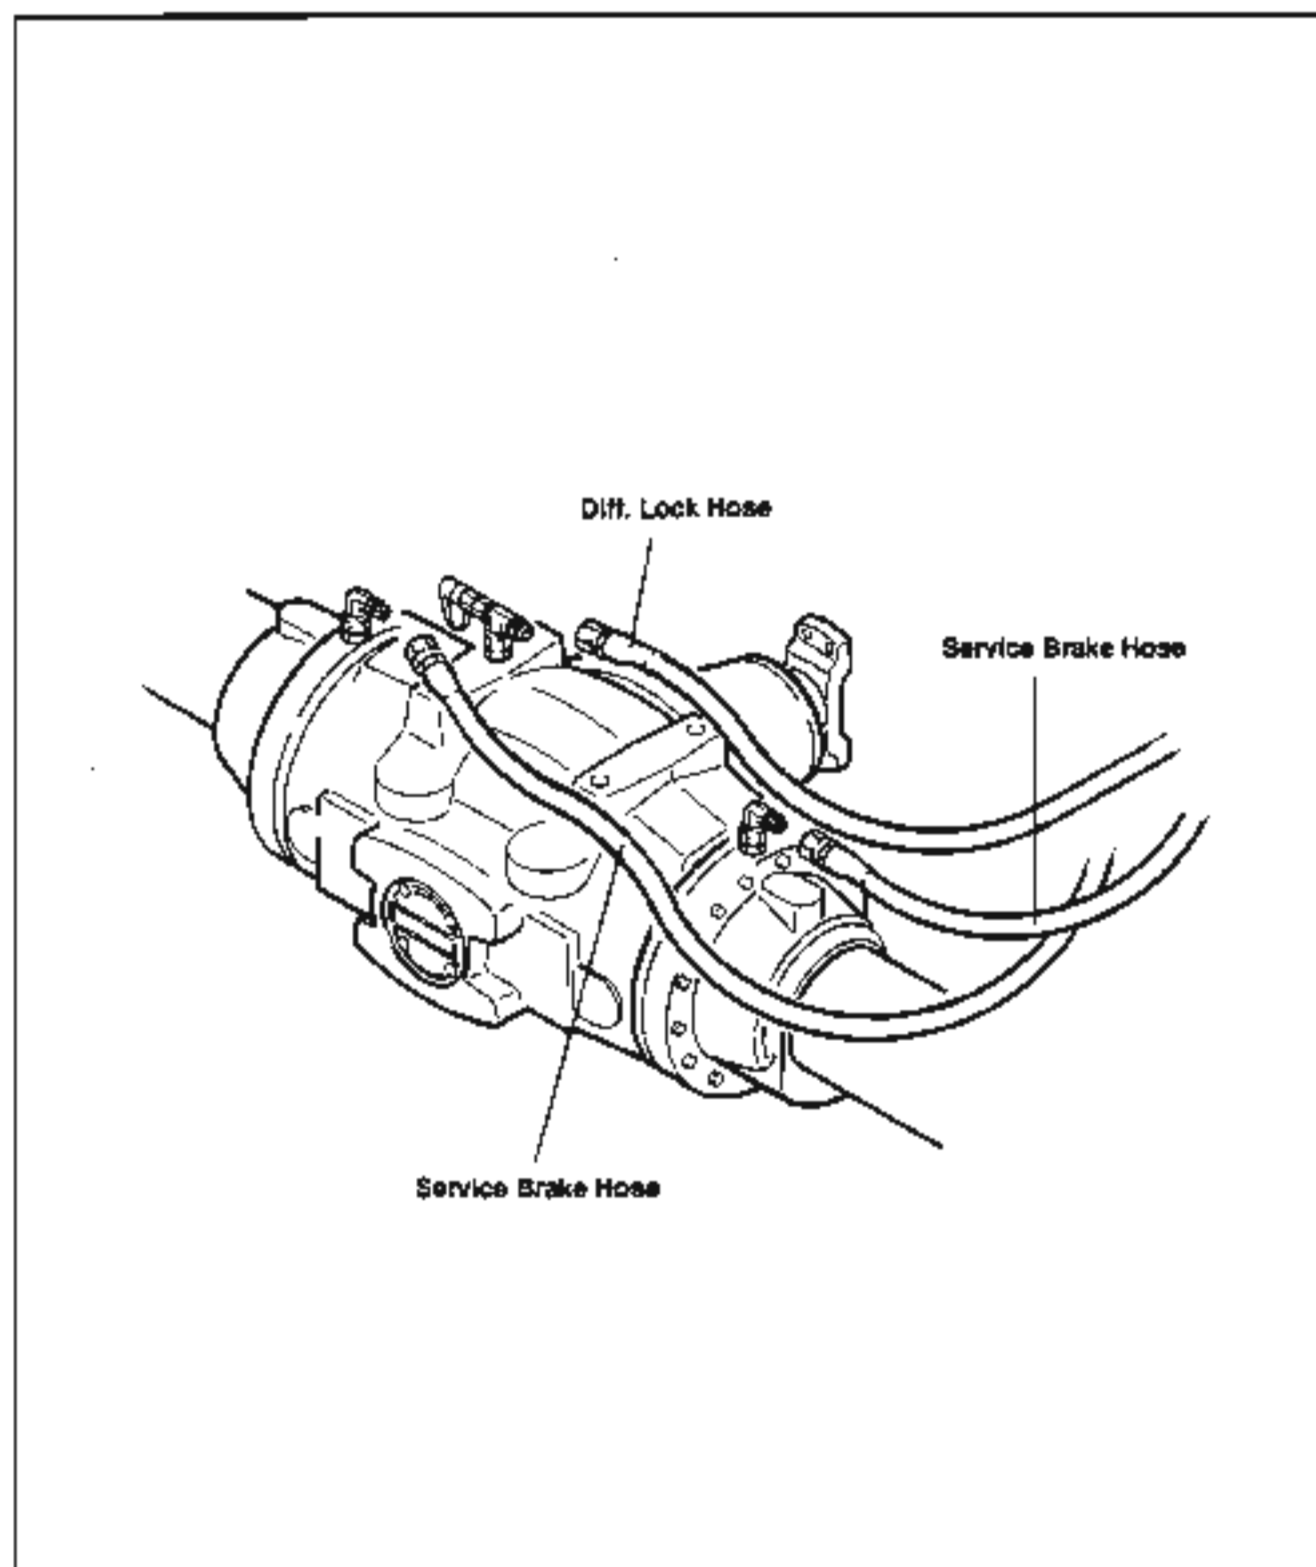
Hydraulic Hose Assembly - Front Axle (Models 622, 622/4, 824)
